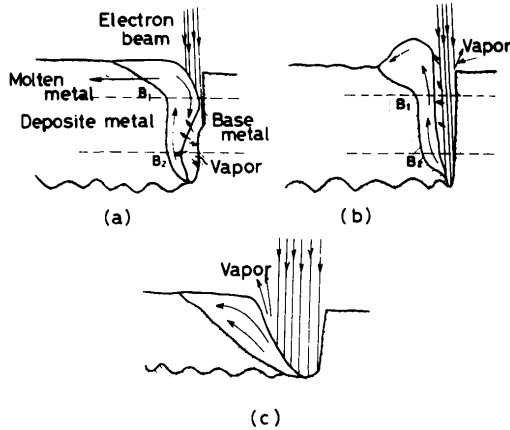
Schematic illustration for behaviour of molten metal in welds.
